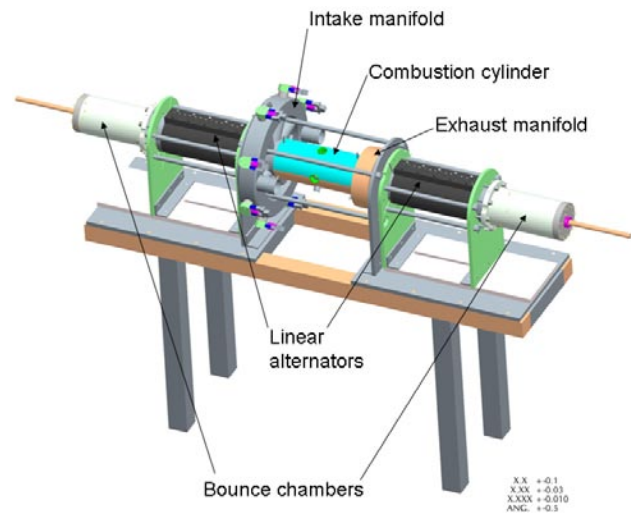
The Free-Piston Engine Research Prototype CAD Model
